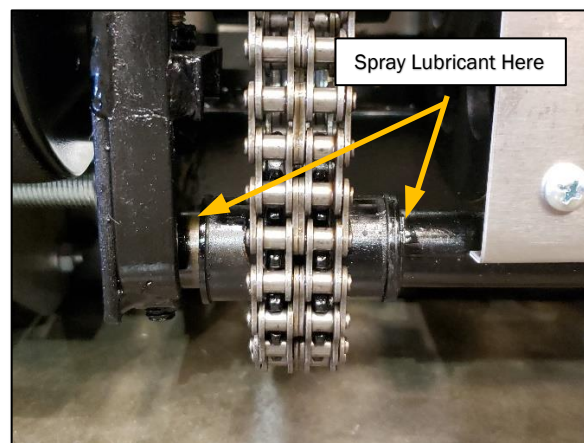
IDLER SPROCKET BUSHING LOCATION
